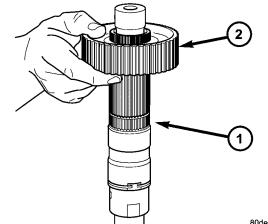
Install Input Gear Retaining Ring 1 - INPUT GEAR 2 - RETAINING RING
